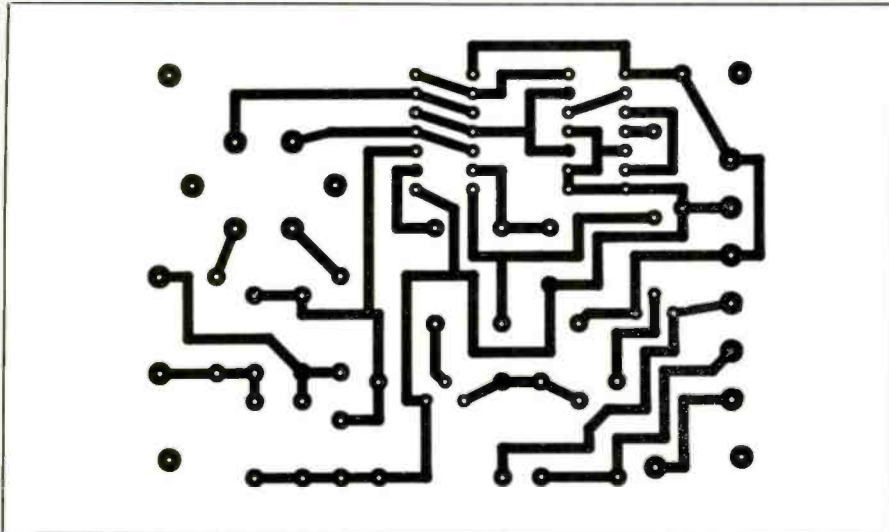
Actual-size etching-and-drilling guide for fabricating printed-circuit board for project.
